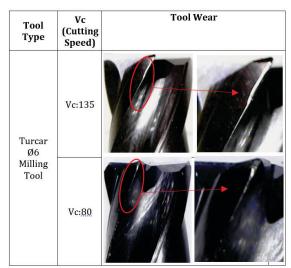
Tool wear for 45min. machining of Ø6 Turcar
